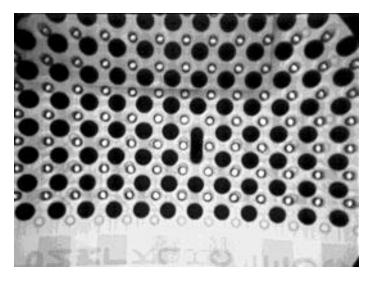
X-ray Micrograph of a Mounted PBGA Showing Solder Shorting
